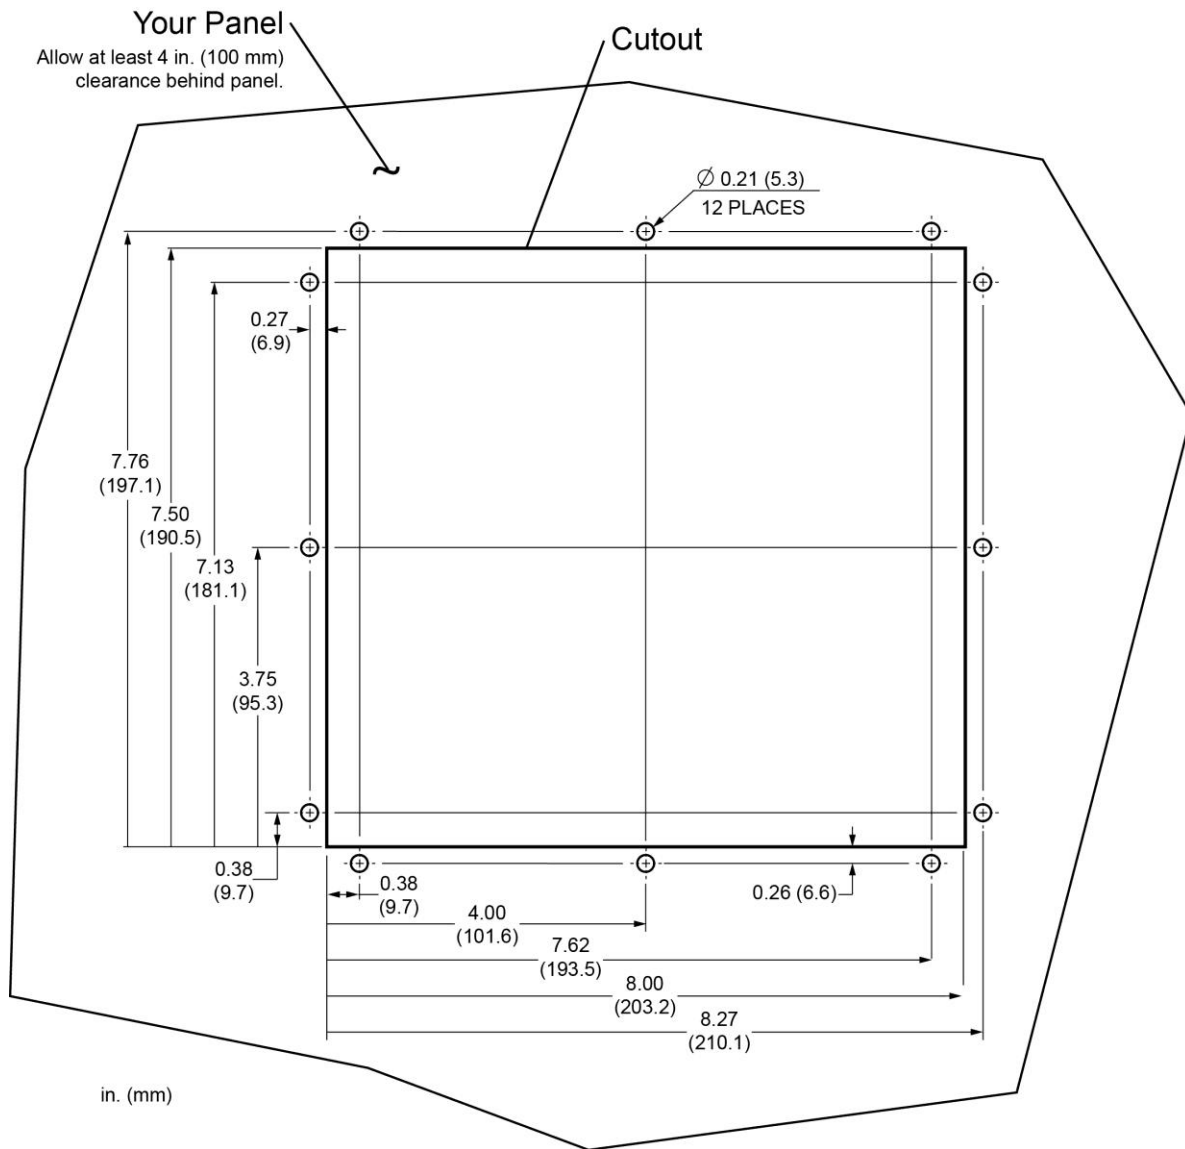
WPC APEX Panel Mount Cutout Dimensions
